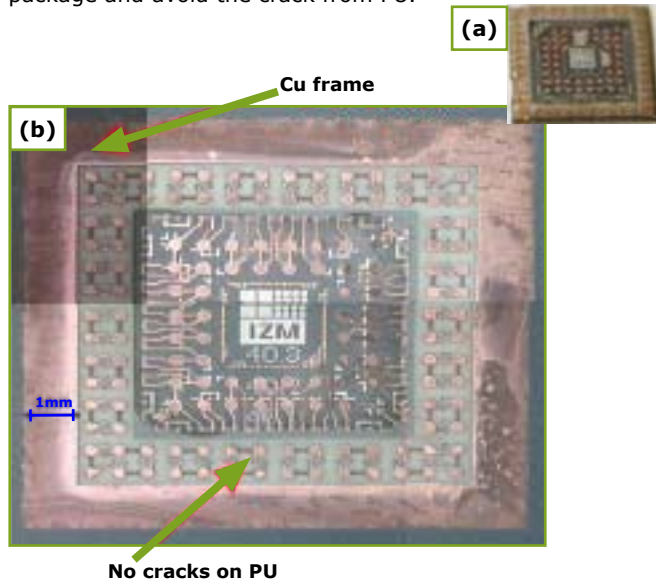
(a) UTFP without Cu frame; (b) UTFP with 1mm Cu frame.
